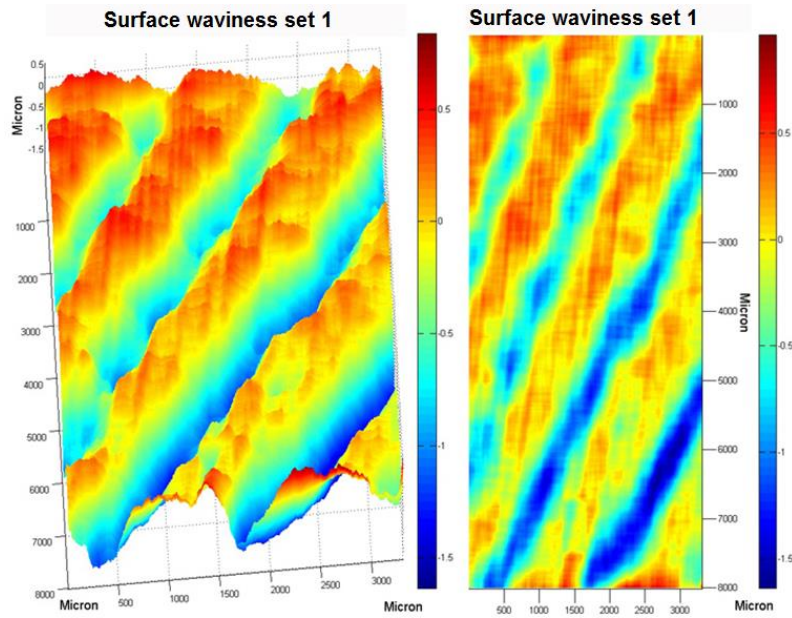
Surface waviness for pinion gear tooth flank (perspective and top view)
